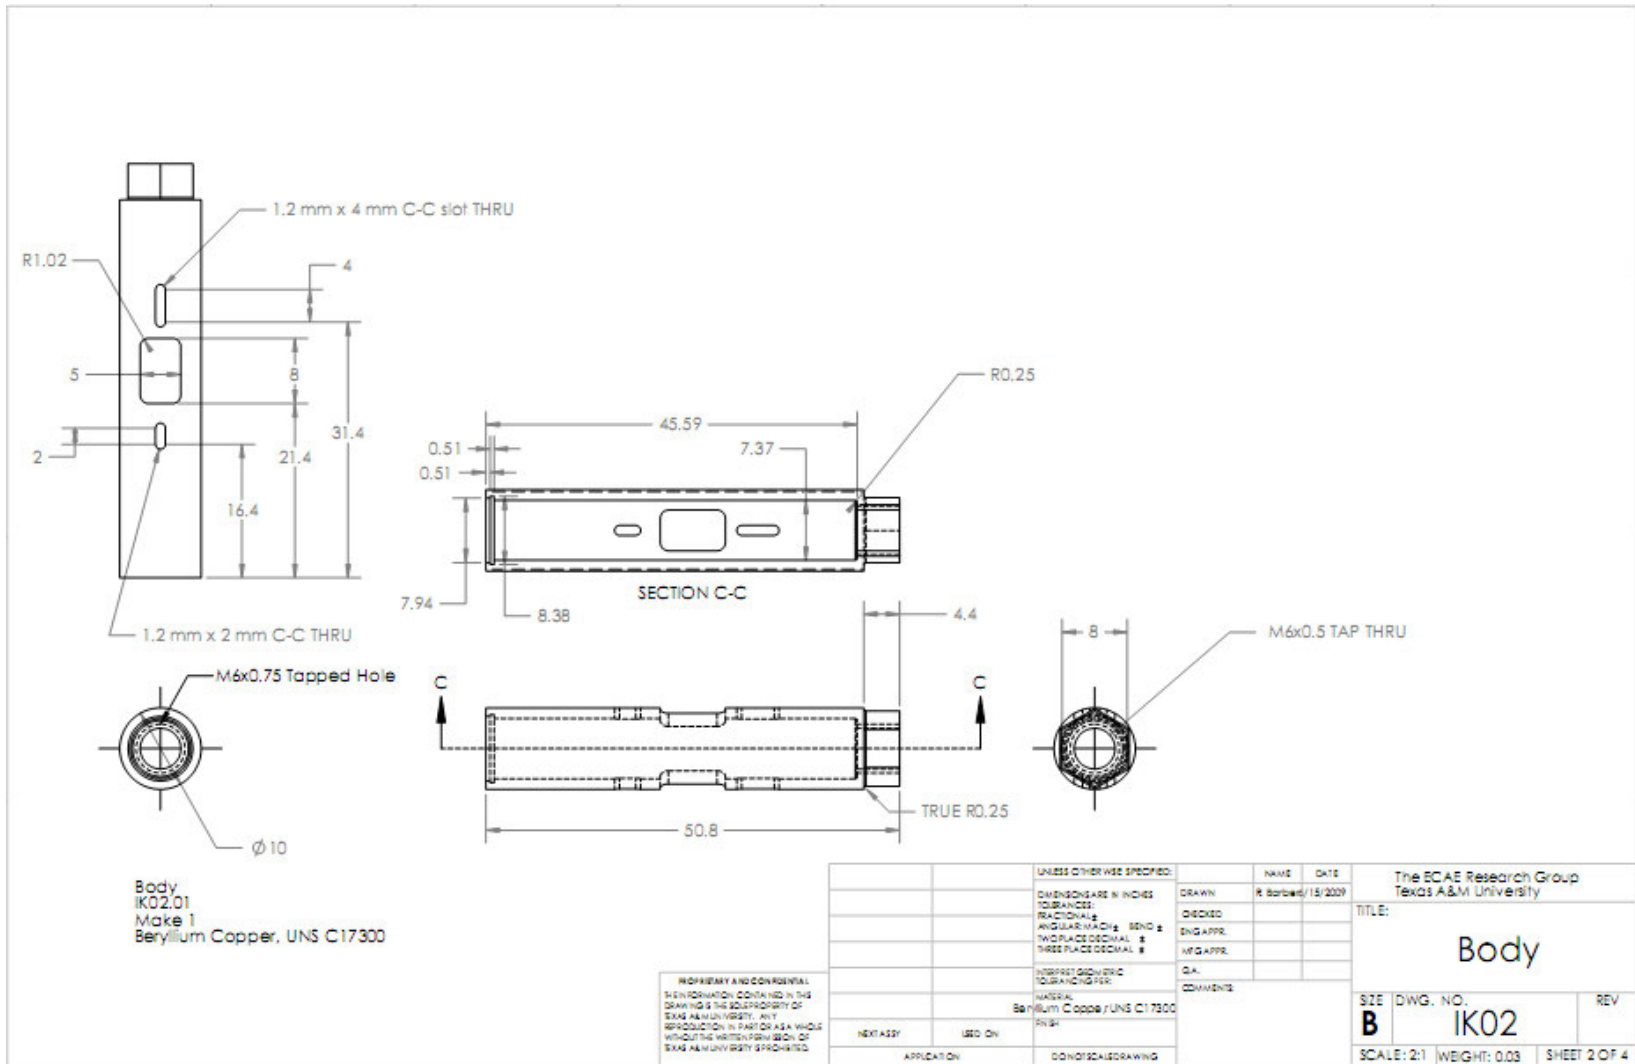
CAD technical drawing of the micro MTM providing the manufacturing details.
